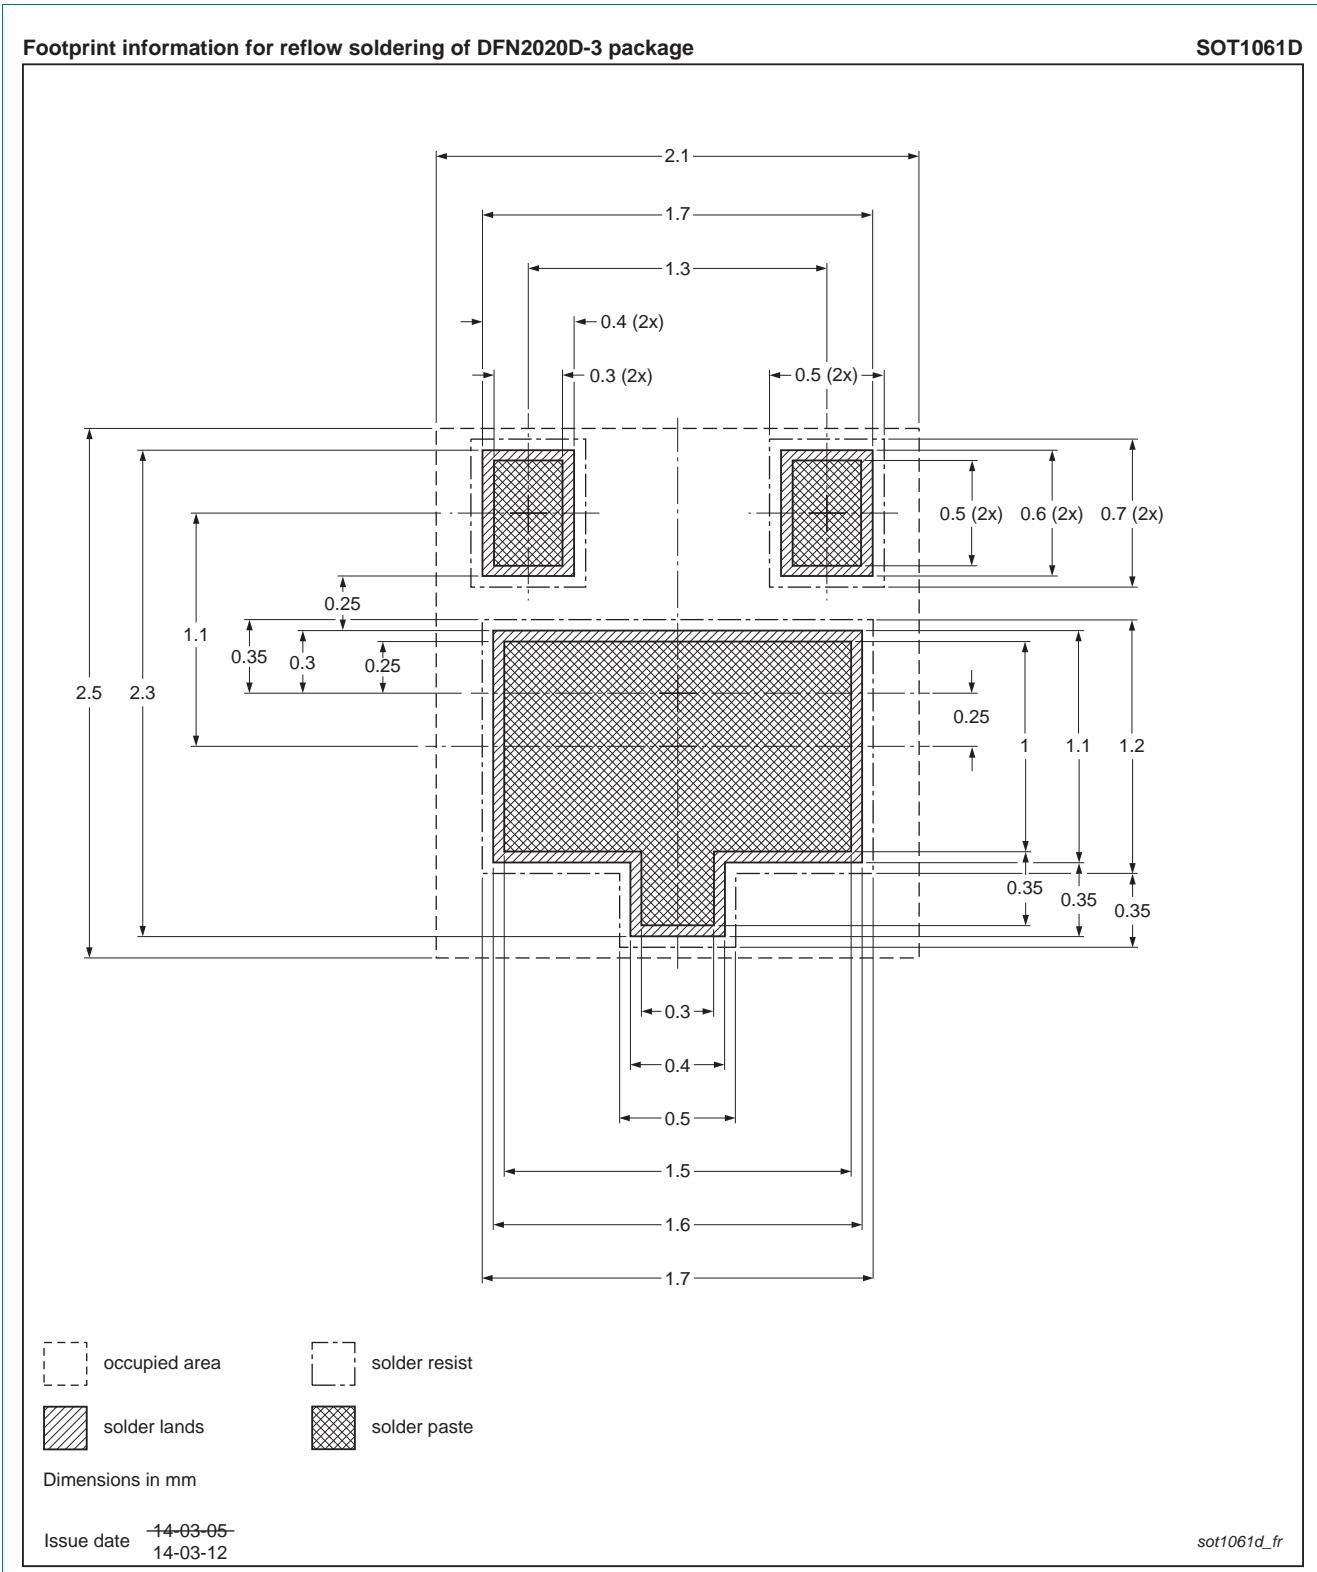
Reflow soldering footprint DFN2020D-3 (SOT1061D)
